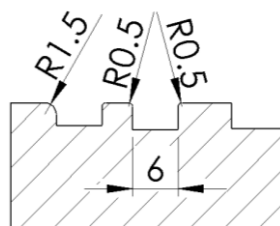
The groove design parameters which the crimp joints from failure mode 2 have in common.
